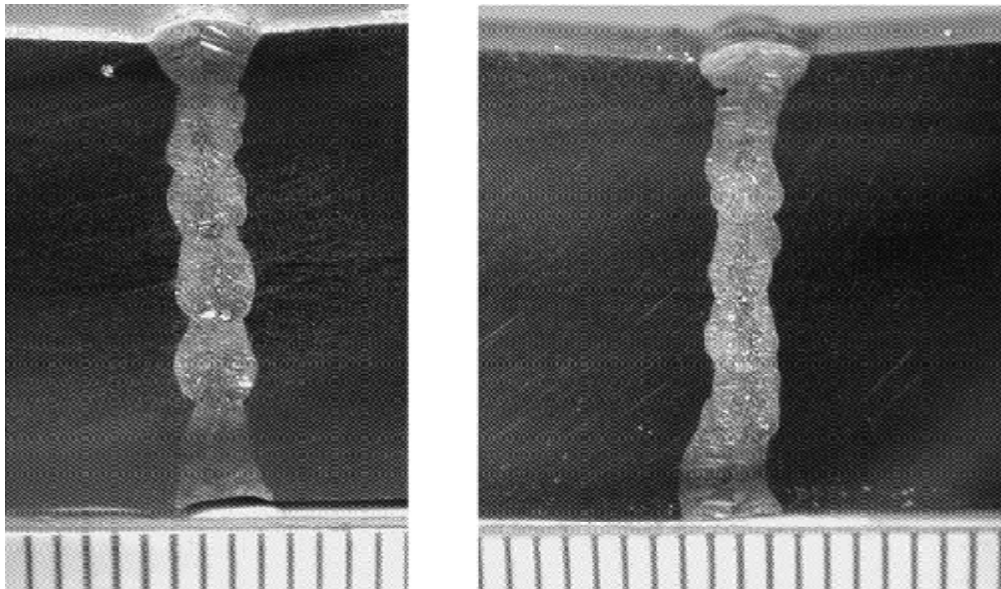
Cross-sections of the welds with plate thickness of 20 mm and five passes. Parameters: laser power, 3 kW; welding speed, 0,5 m/min; filler wire, 4,5-6,0 m/min (Jokinen & Kujanpää, 2003)
